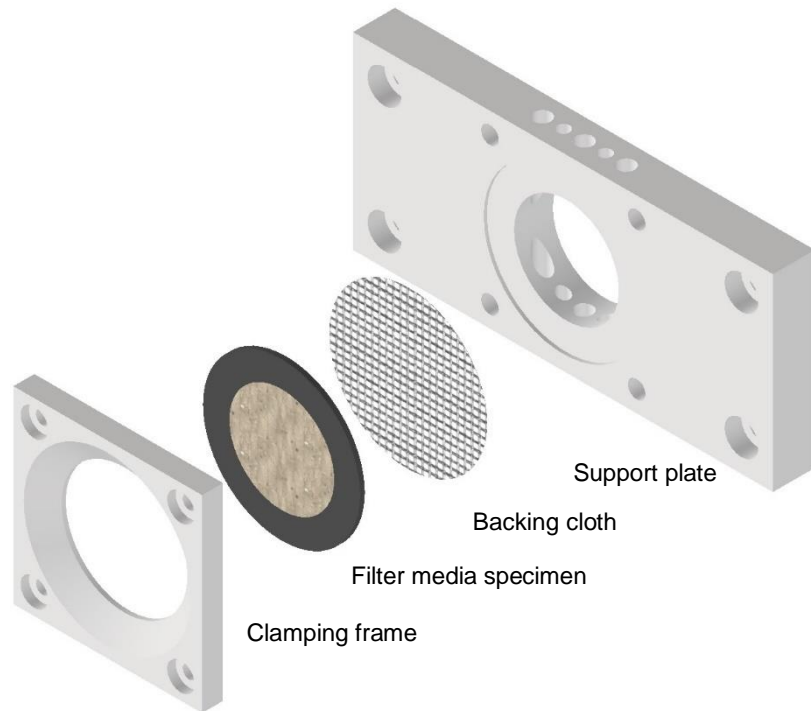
Design of the sample holder of the nozzle test station consisting of a support plate onto which the filter medium sample and a backing cloth are fixed with a clamping frame.
